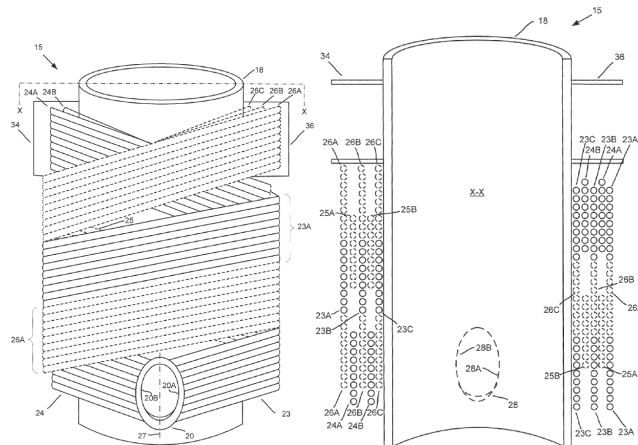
In the left: an illustration of an heat transfer system comprising a plurality of heat transfer tubes. In the right: cross-section taken through the heat transfer system in the left. 15 = The heat transfer system, 18 = Thermal housing, 20 = Lower integral tubesheet/plenum, 23 = First set of heat transfer tubes, 24 = Second tube set [21]
